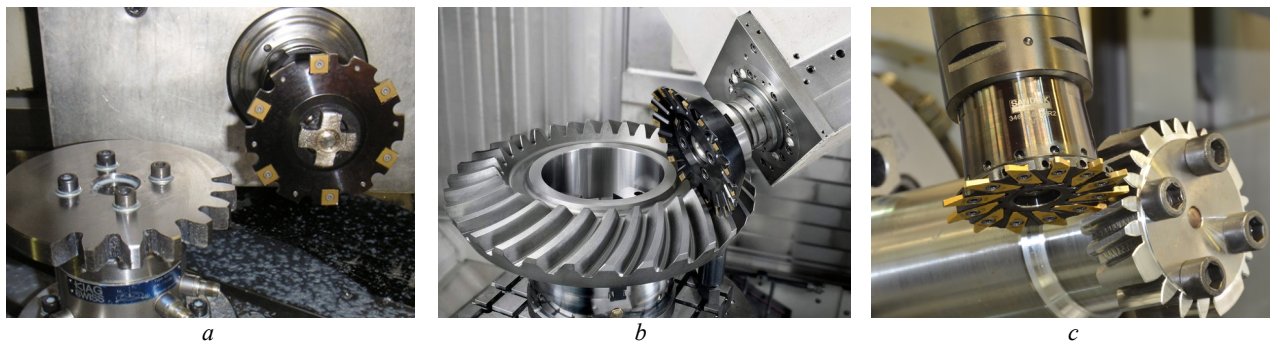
Implementation of gear cutting with disc-shaped milling tools: a) IfW, b) Heller; c) Sandvik 7, 11, 12
